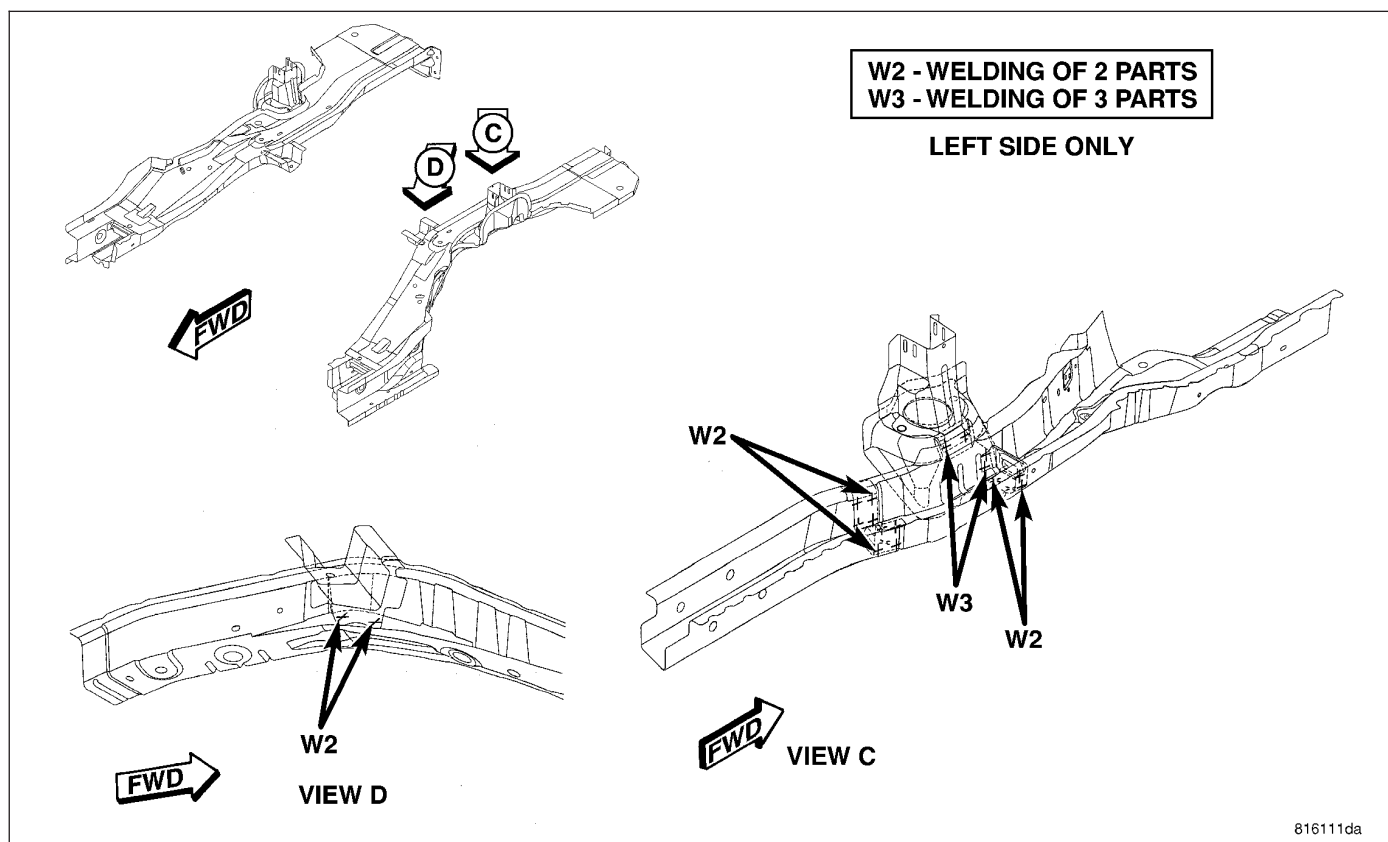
SIDEMEMBER ASSEMBLY (12 OF 17)
